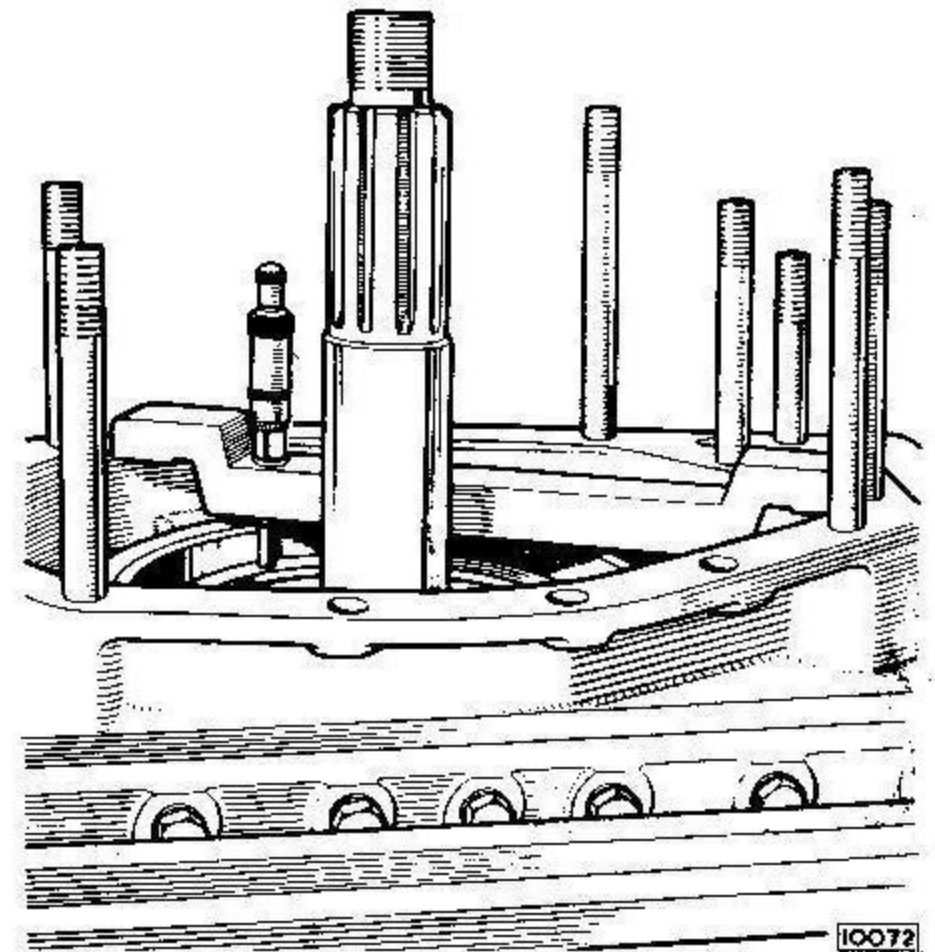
Checking the distance between transfer box face and input shaft bearing face
